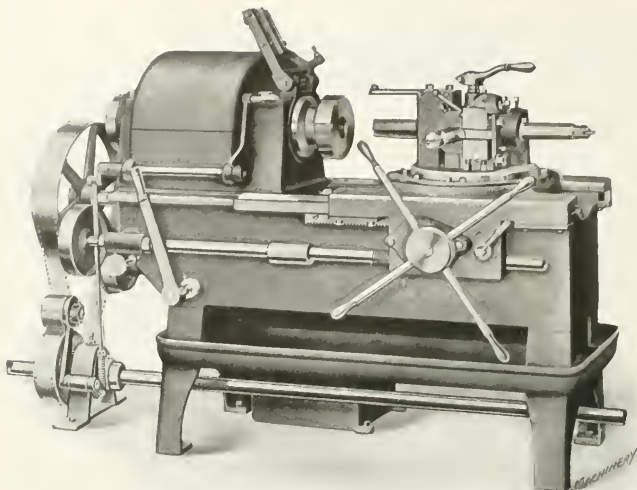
Blood Turret Lathe for machining 3-inch Shrapnel and High-explosive Shells
